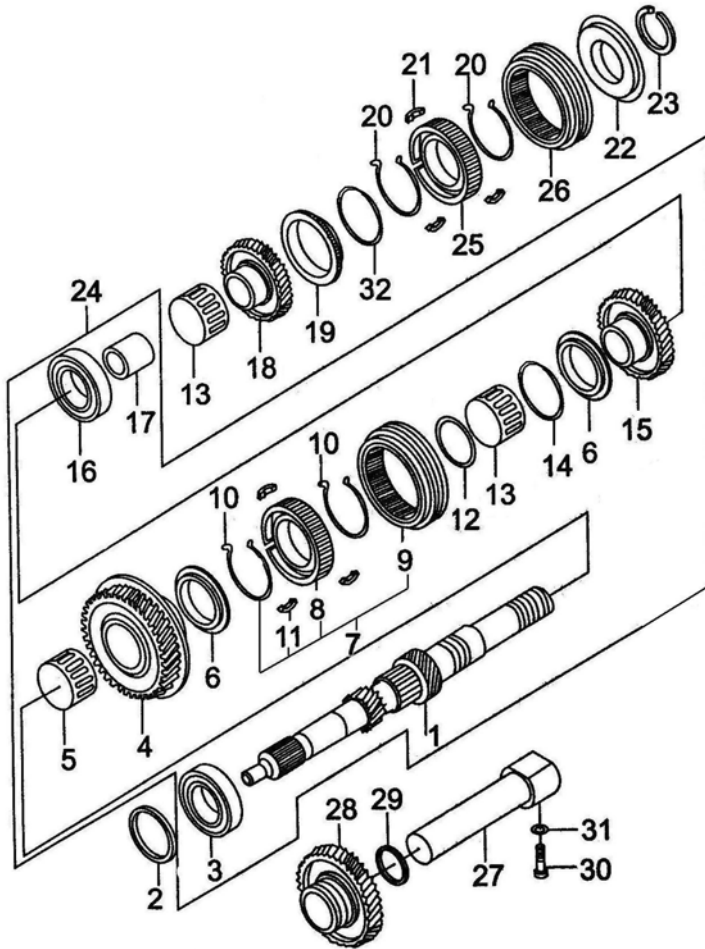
Transmission assembly(five gear) – input shaft and reserve shaft
